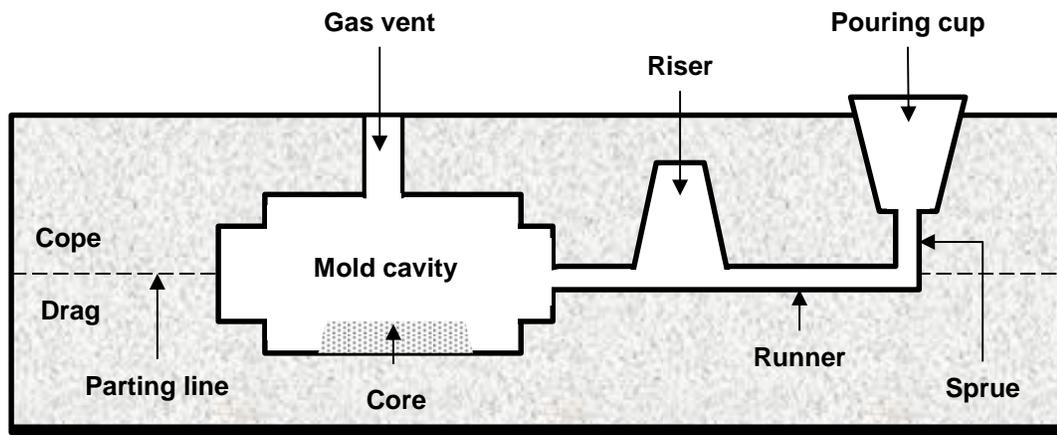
Mold for Sand Casting (adapted from www.substech.com/)
